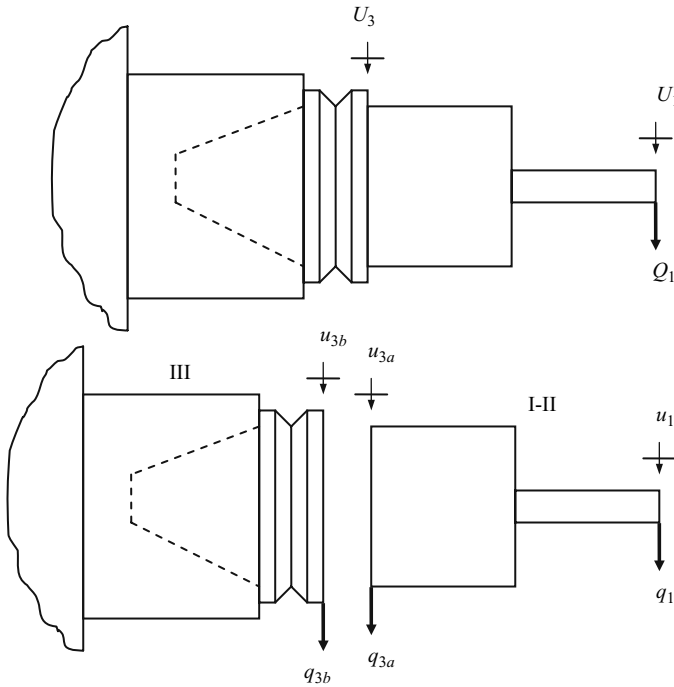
The I-II (sub)assembly is rigidly coupled to the spindle-machine (III) to determine the tool point receptances, G_{11}
